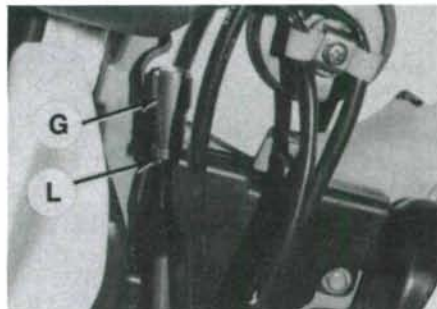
On JS650SX models, loosen locknut (L) and remove joint (G) from ball joint on handlebar pivot plate and rotate joint (G) up or down on threaded end of steering cable as needed to center jet pump steering nozzle when steering handlebar is in a straight ahead position.
